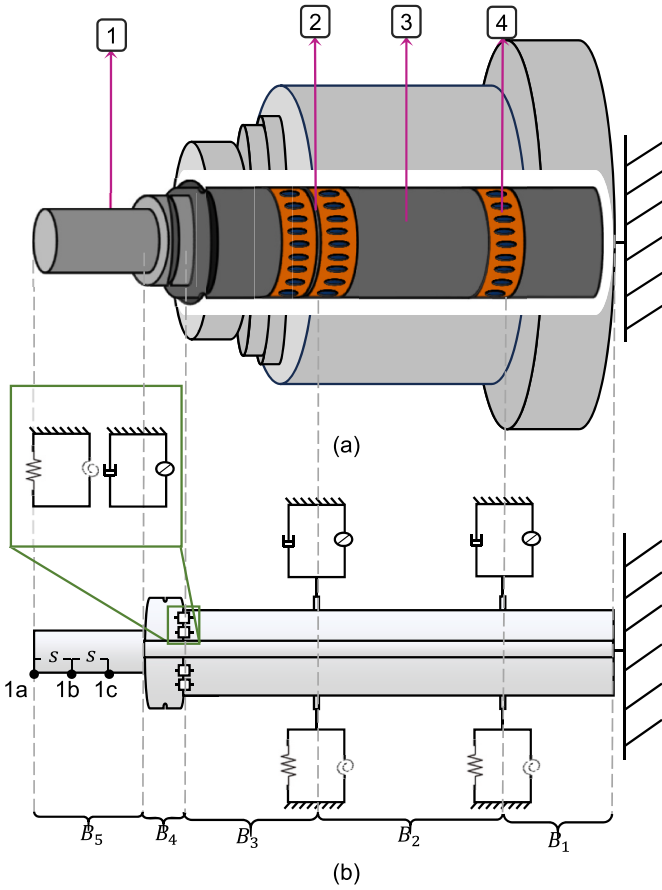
Spindle-holder-tool assembly: (a) in complex and (b) simplified form using cylindrical beams (denoted as B), interfaces, and bearings. Components labelled: (1) Holder, (2) Front Bearing, (3) Spindle, and (4) Rear Bearing.
